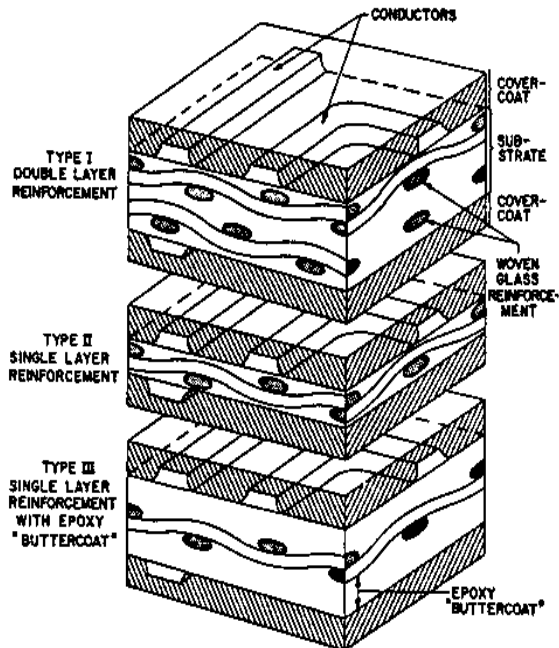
Typical flexible printed wiring construction which makes use of woven glass reinforcement [1]. © 1976 IEEE
